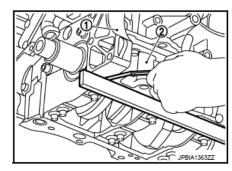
Checking Surface Height Difference Between Rear Timing Chain Case And Lower Cylinder Block Courtesy of NISSAN NORTH AMERICA, INC.
